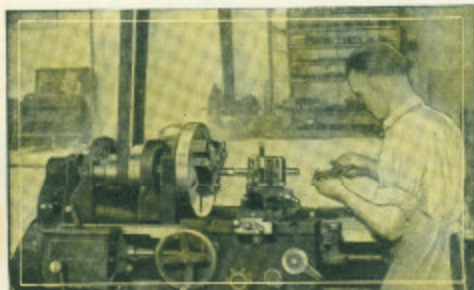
Boring a Special Tool That is Bolted on the Face Plate.
